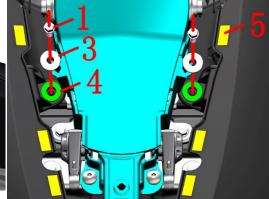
FRONT FORK COMPONENT		Cover panel component	CHK	(0)
